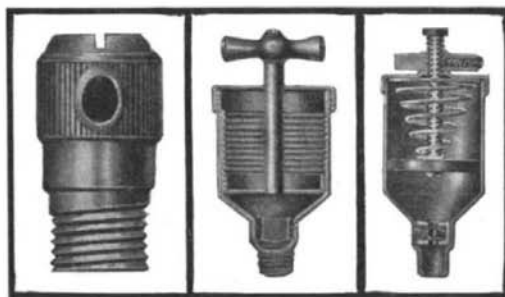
TYPICAL LUBRICATING DEVICES.
